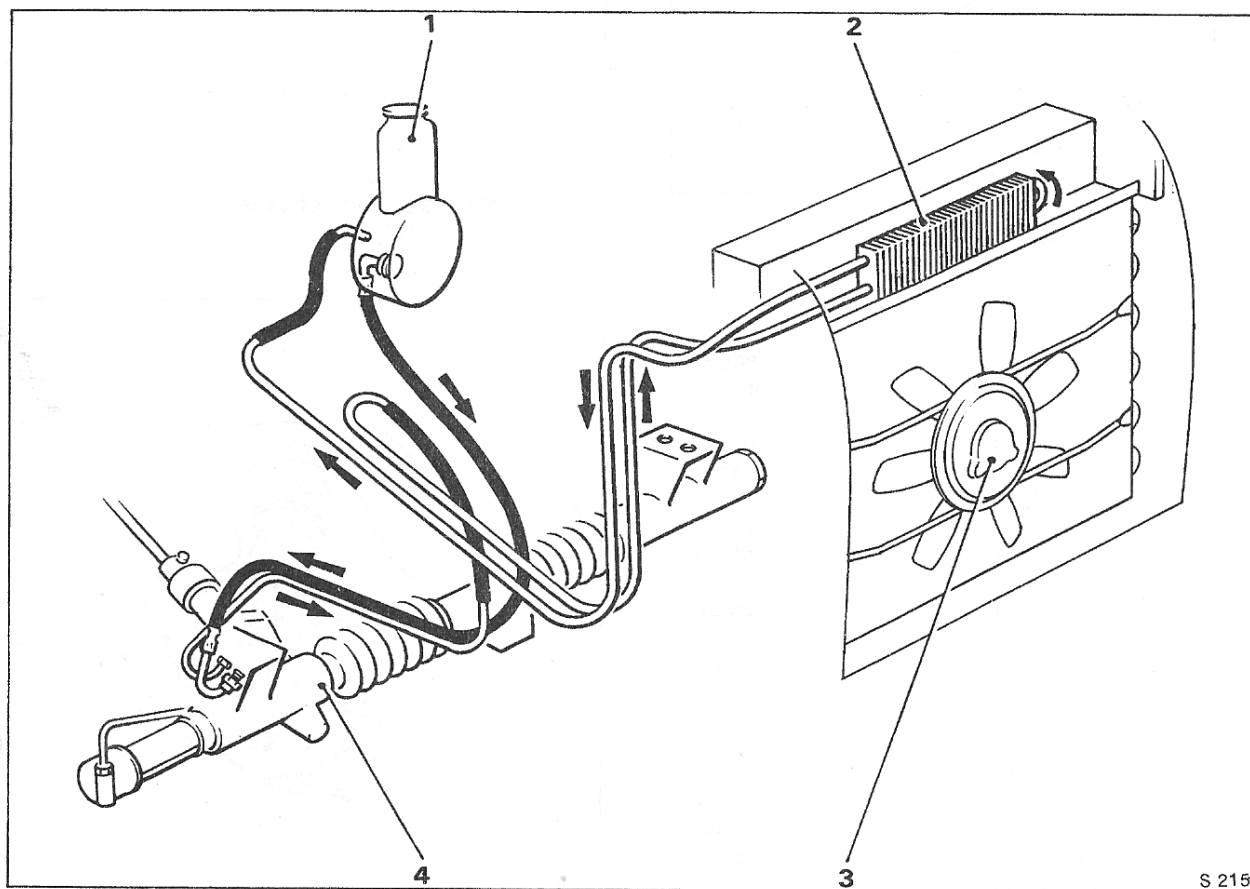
Hydraulic pipe runs. Right-hand drive car
